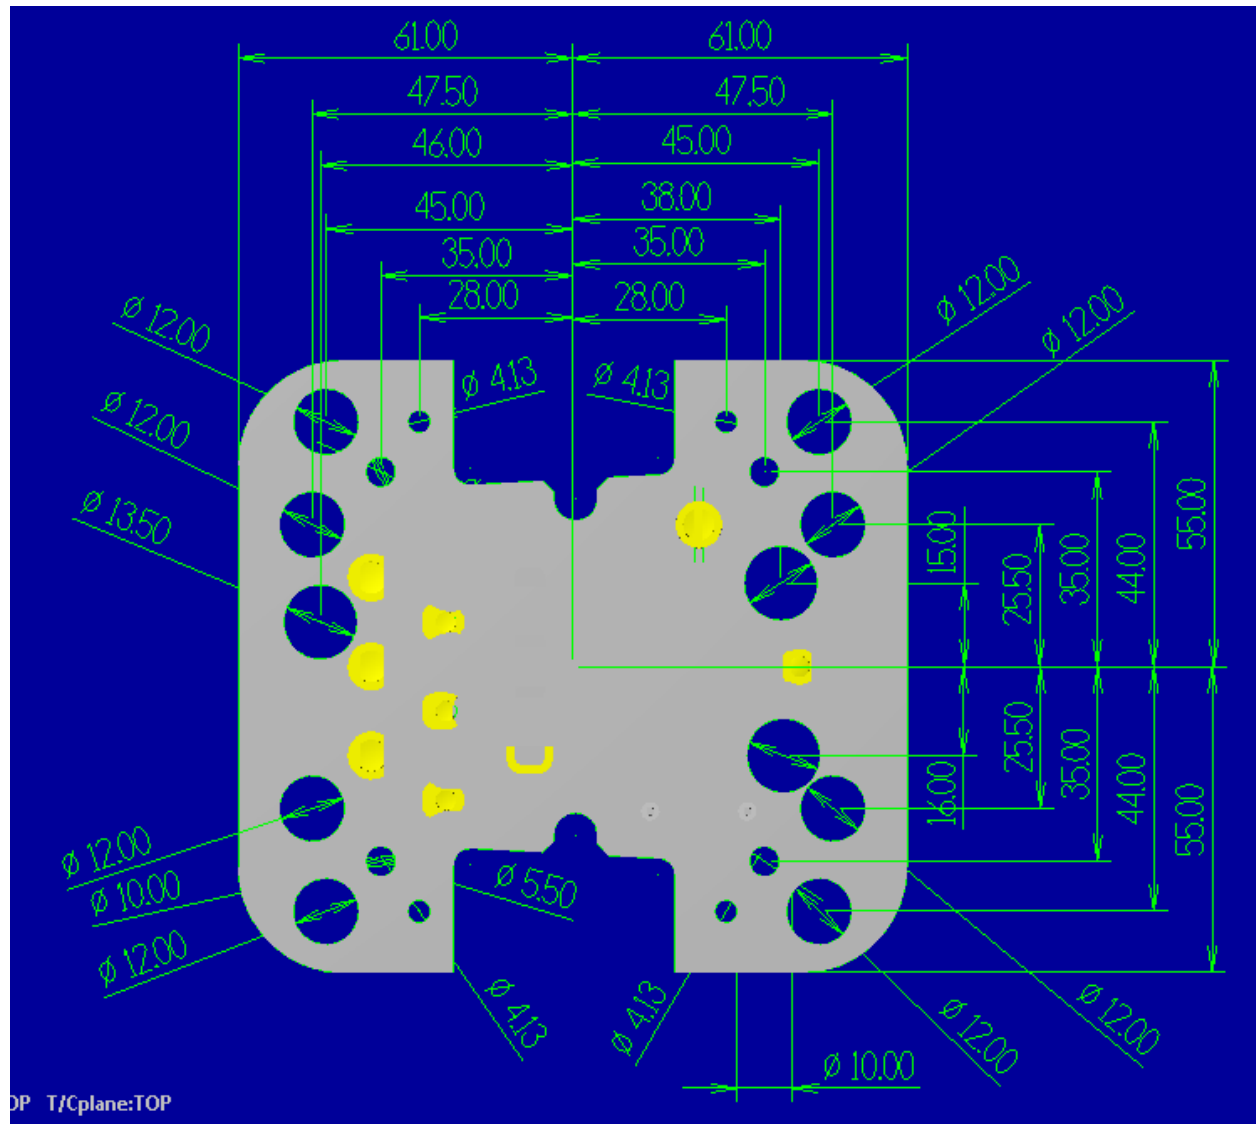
Detailed CAD engineering design and dimensions of the multi-station jig after modification.
